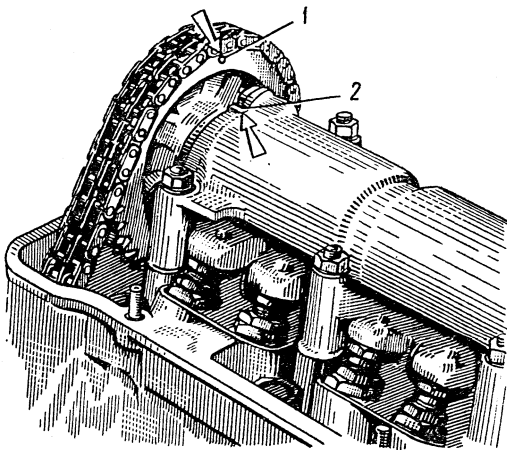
Alignment of Timing Marks on Camshaft Sprocket and on Bearing Housing:
